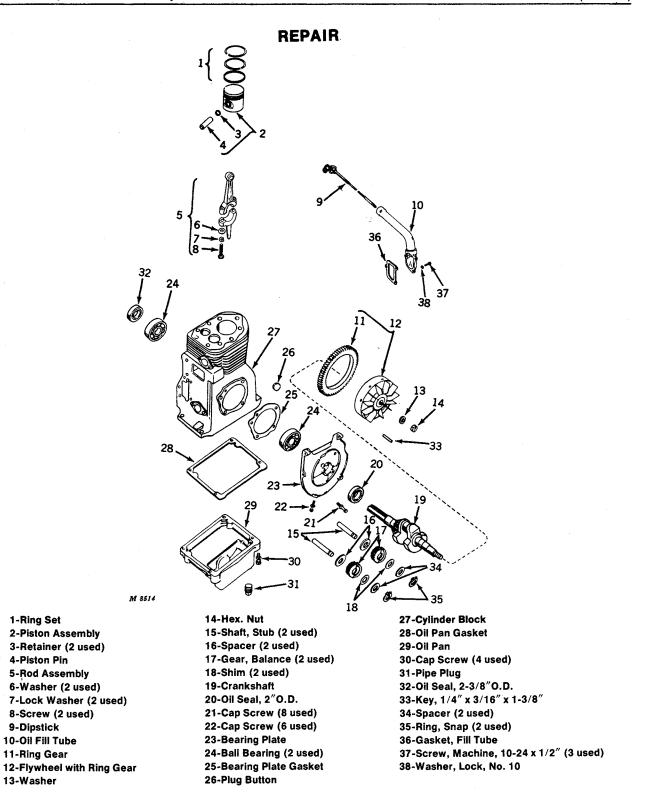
Exploded View Showing Piston, Connecting Rod, Crankshaft, Flywheel, Main Bearings and Oil Seals
